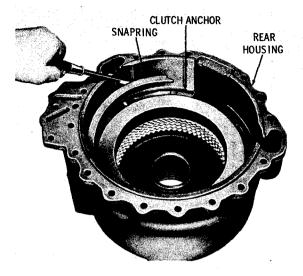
Removing clutch anchor snapring (TRT 2221-1, 2421-1)
